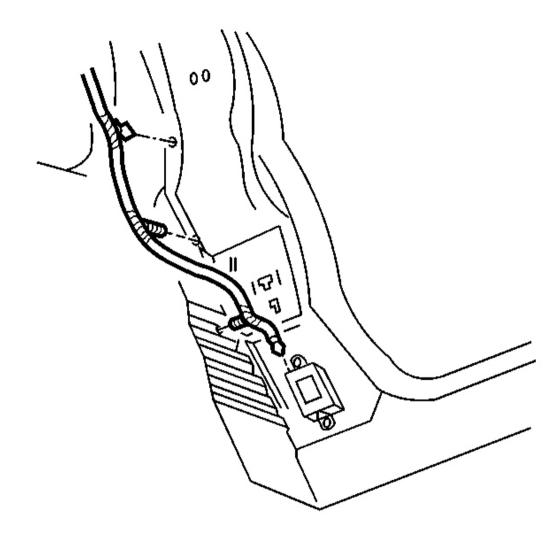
Coaxial Extension Cable At Antenna Module Courtesy of GENERAL MOTORS CORP.
